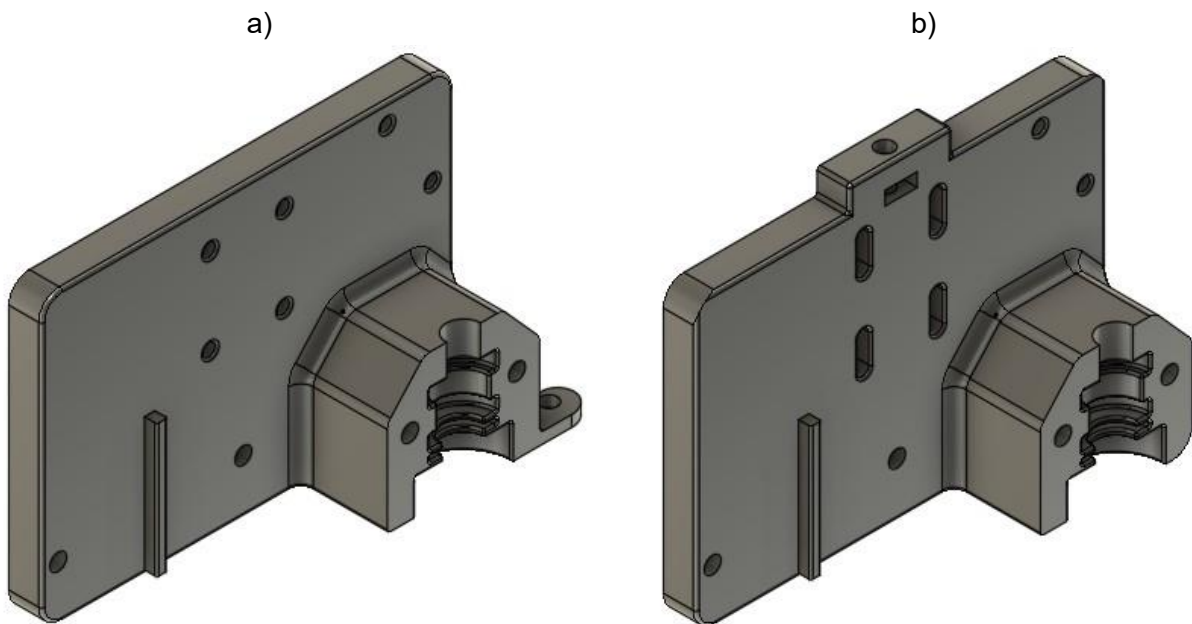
a) primary mounting plate for extruders, b) secondary mounting plate for extruders
